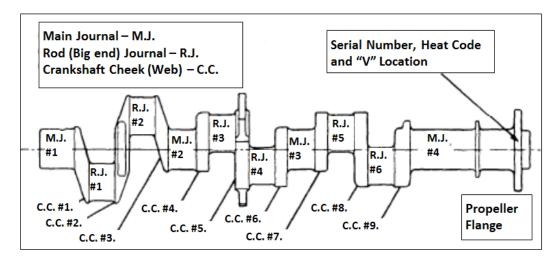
Crankshaft component identification (Ref. Teledyne-Continental CSB 96-8).
